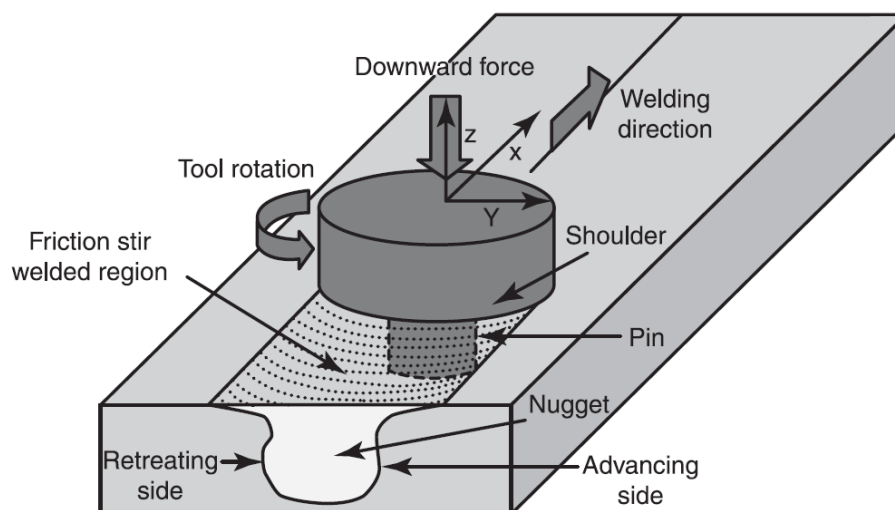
Scheme of friction stir welding [40]. Friction stir processing differs solely by the application on one single part.
